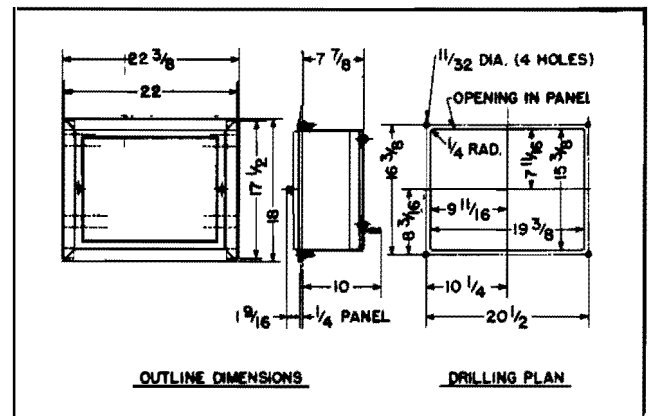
Outline Dimensions, Types RI-2, -7, -8, -10 Meters Flush Type.
